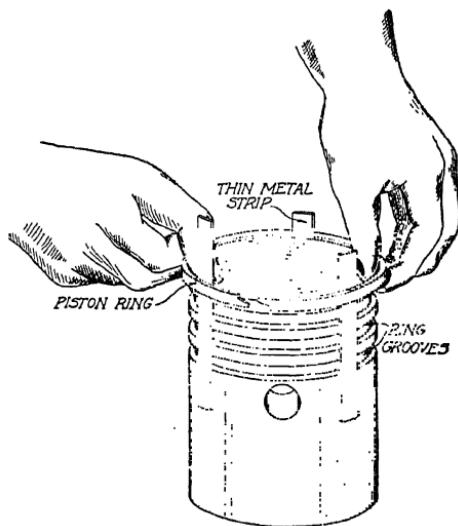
Using Piston Ring Skids for Installing or Removing Pistons
